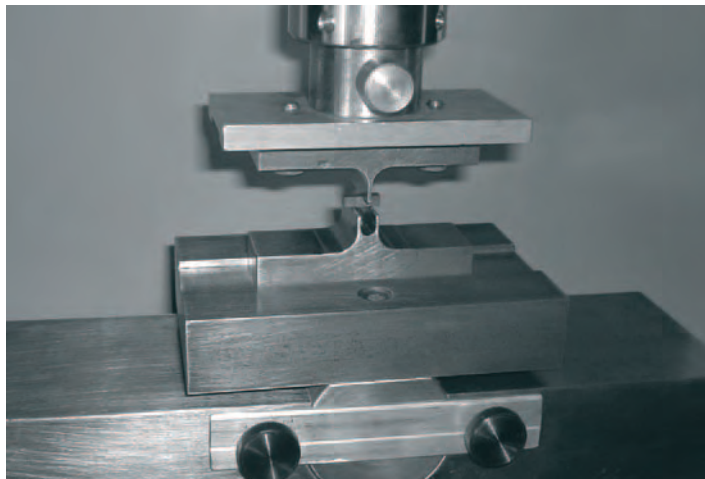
Photograph of the special CNC jig manufactured for the testing of Specimen A samples (3 mm × 3 mm × 10 mm)
